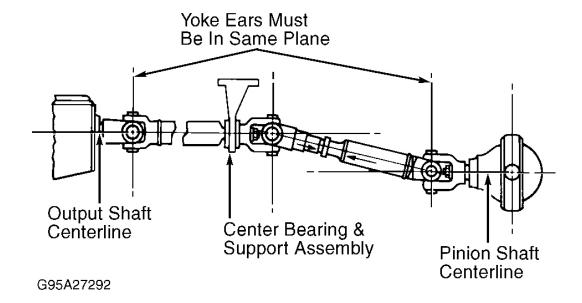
Phase Alignment Of 2-Piece Drive Shaft (3-Piece Shaft Is Similar)
